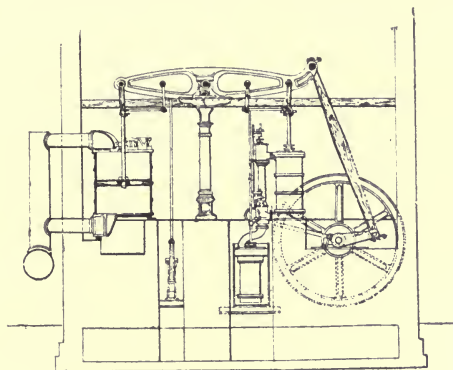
Beam Blowing Engine. Air Cylinder, 96 in. diameter ; Steam Cylinder, 44 in. diameter by 8 ft. stroke.
